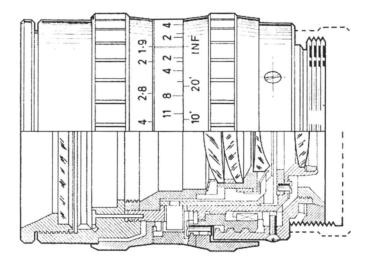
Sectional view of a 25.4 mm focal length, f/1.9 motion picture lens assembly. (Adapted from Horne.¹⁷)
